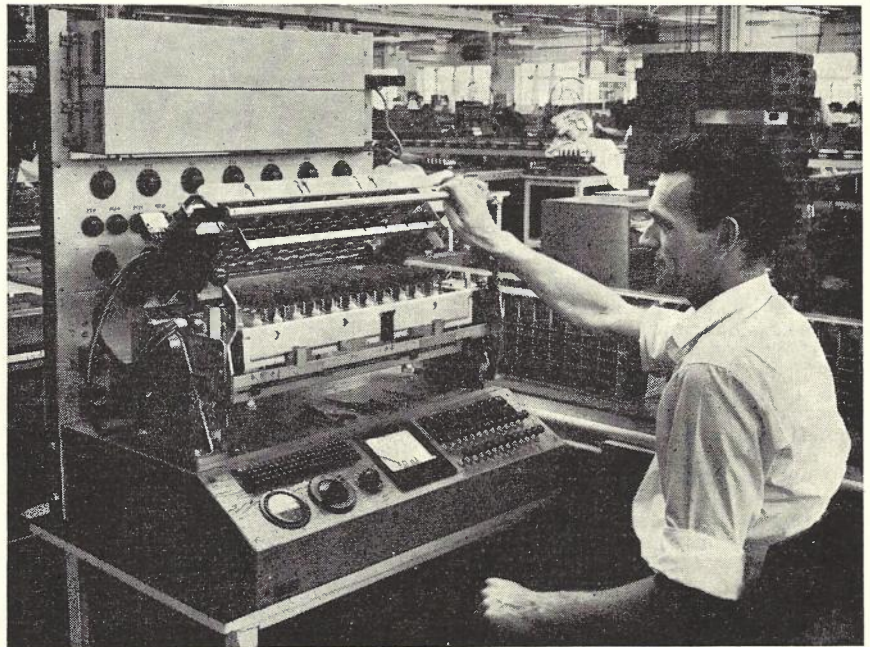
Testing of Crossbar Switch. The contact head is seen being lowered into position where it will make contact with the terminal array on the rear side of the switch.
